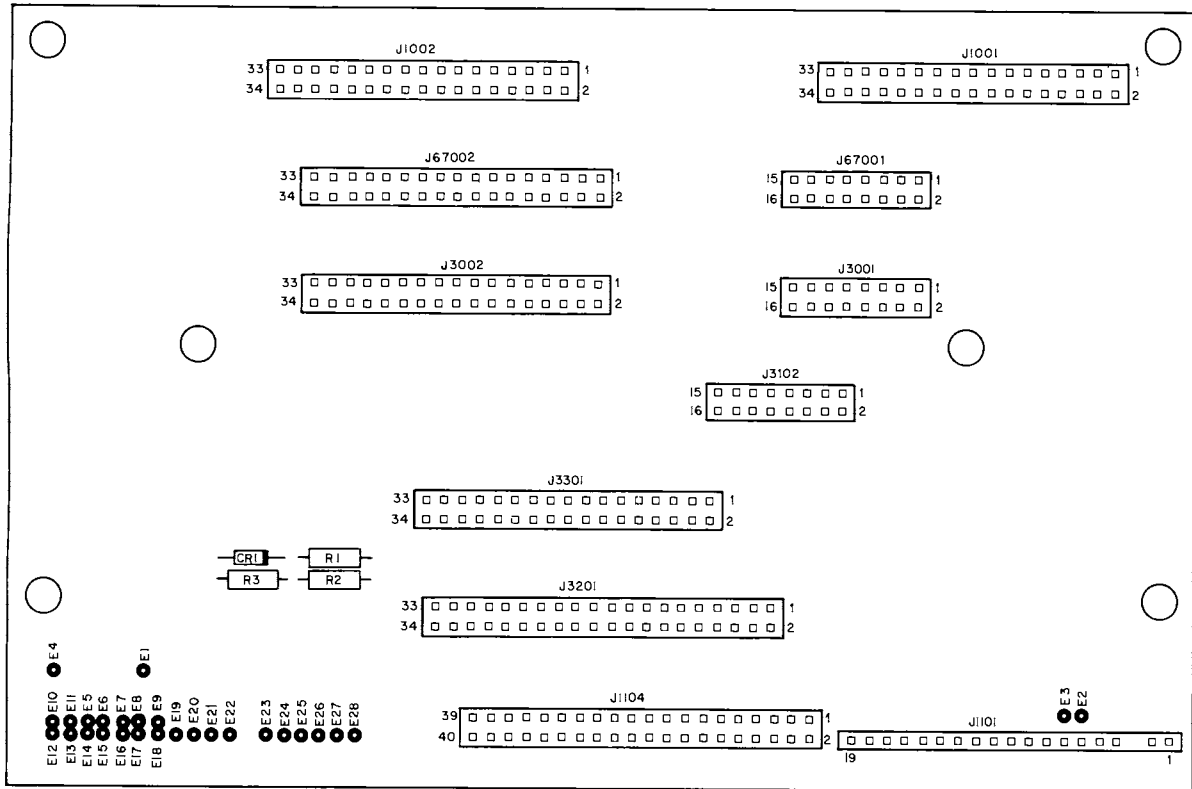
MOTHERBOARD PC BOARD ASSEMBLY
